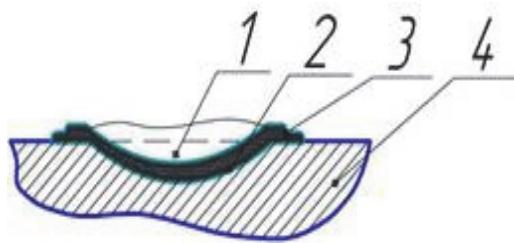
A hole formed on surface of material after a single pulse: 1 – melted metal; 2 – white layer; 3 – cushion around the hole; 4 – workpiece
